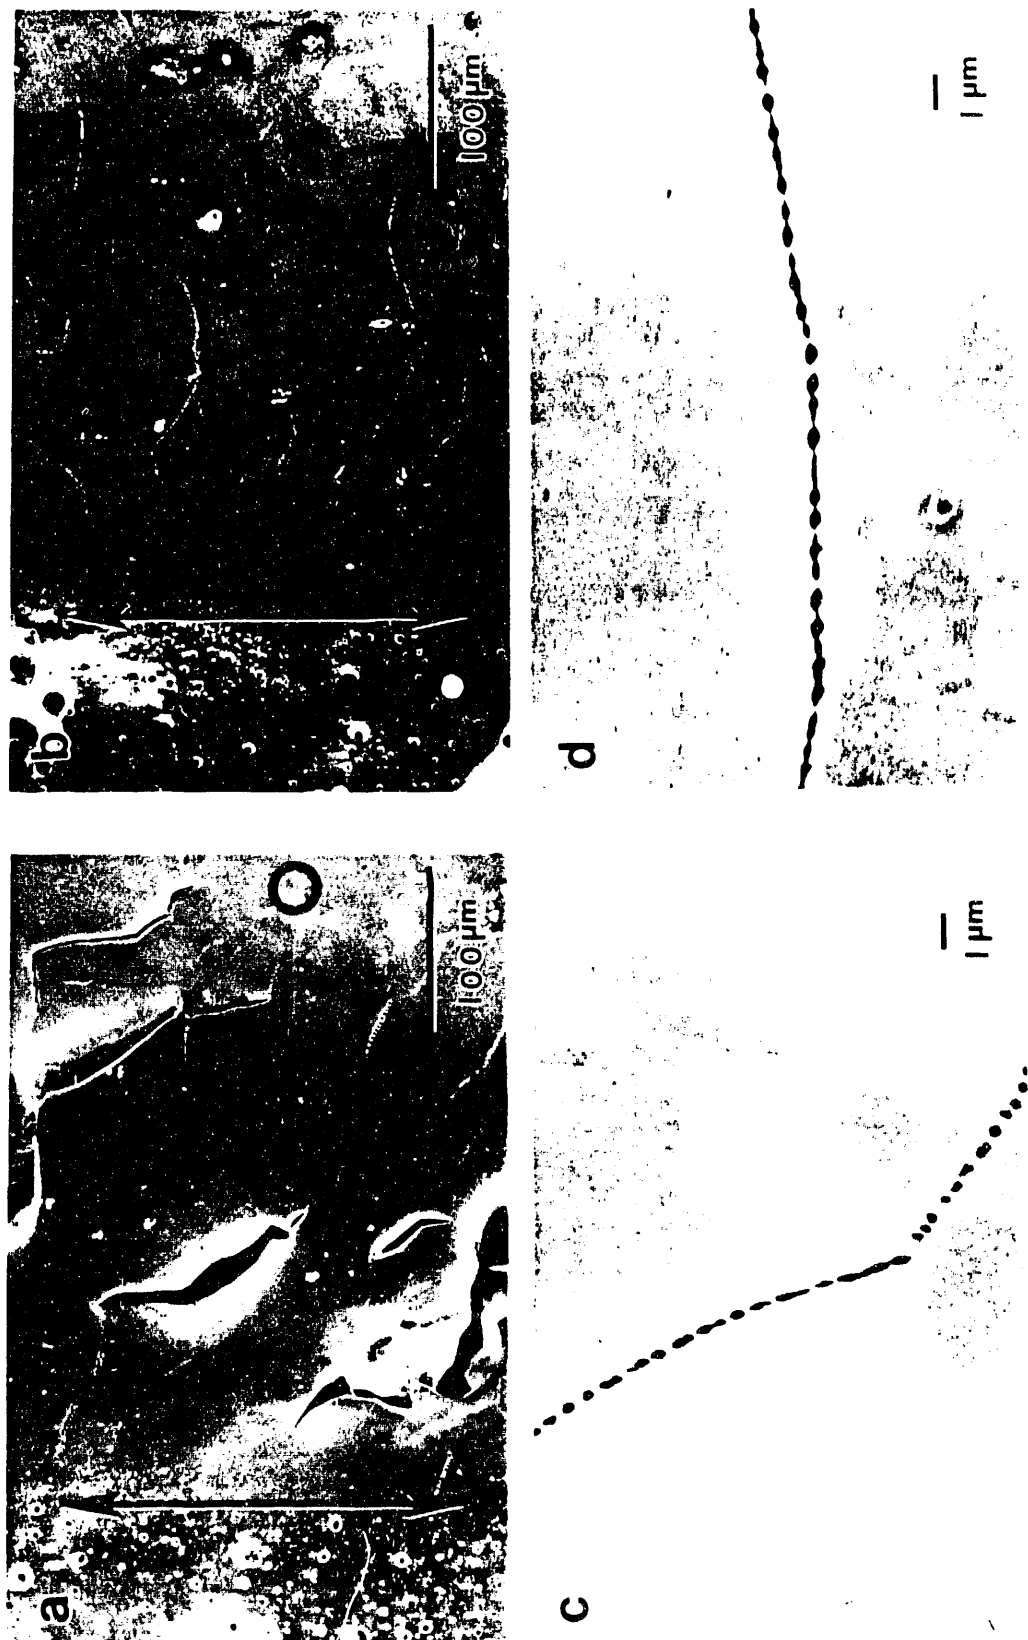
SEM photographs of the jet-polished TEM discs from (a) standard GTA weld; (b) stress-modified GTA weld. Arrows indicate the welding direction. Note that the applied compressive stress in 3b effectively suppressed grain boundary cracking associated with bubble growth and favored bubble growth on grain boundaries perpendicular to the weld. (c) and (d) are magnified views of the circled areas in (a) and (b) respectively.
